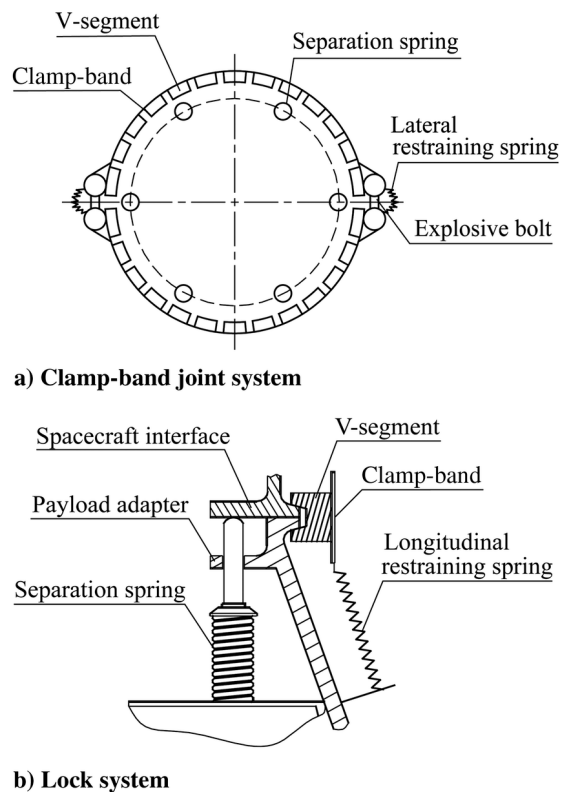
Concept of release mechanism using an explosive bolt and a clamp-band [3]
